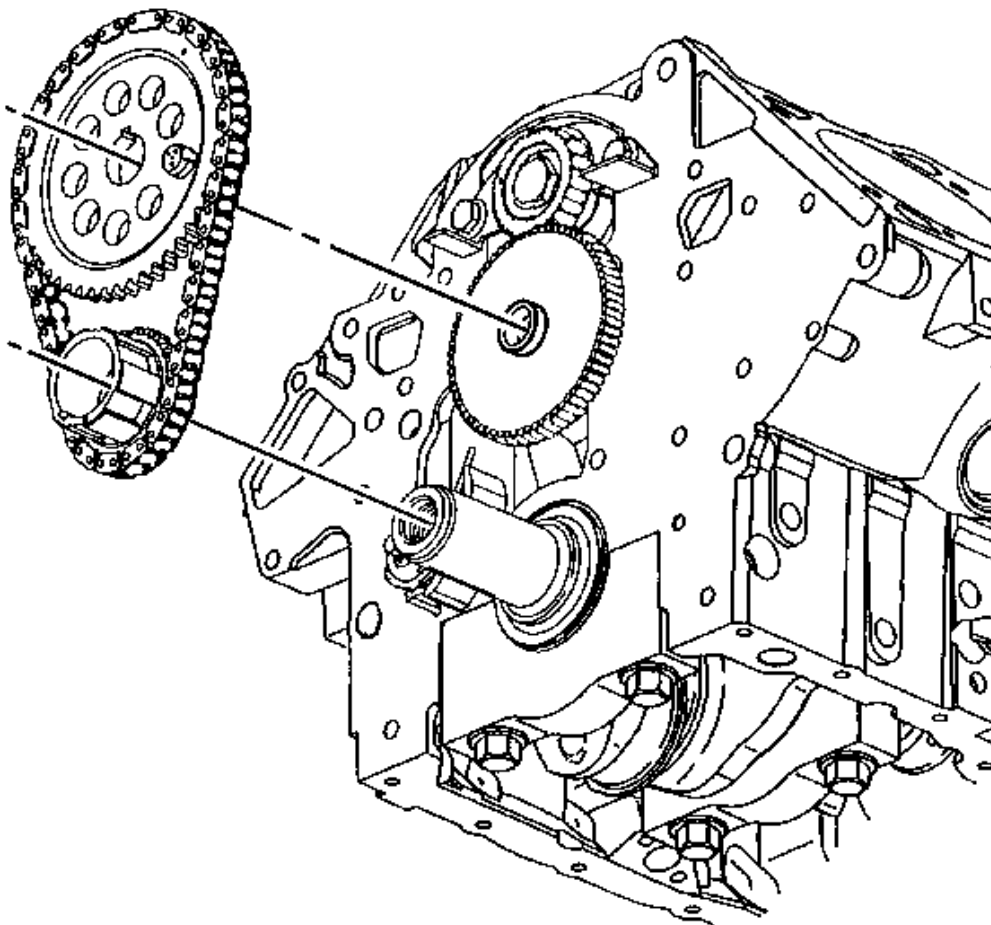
Removing Camshaft Sprocket & Timing Chain
